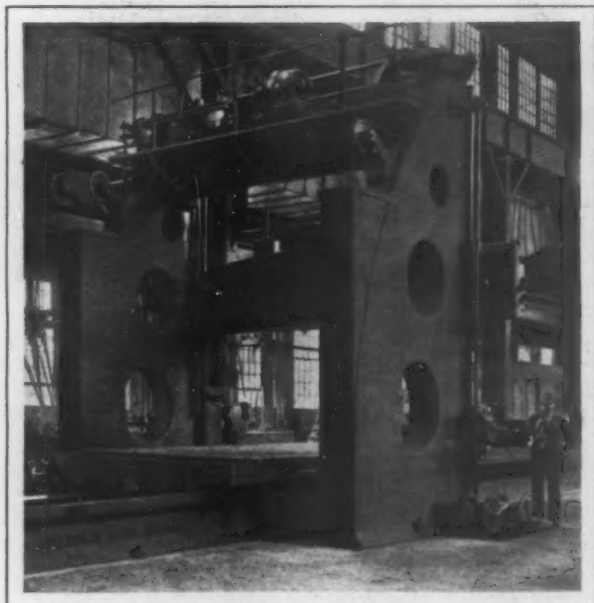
Rear View of the Machine Showing the Massiveness of the Housings
